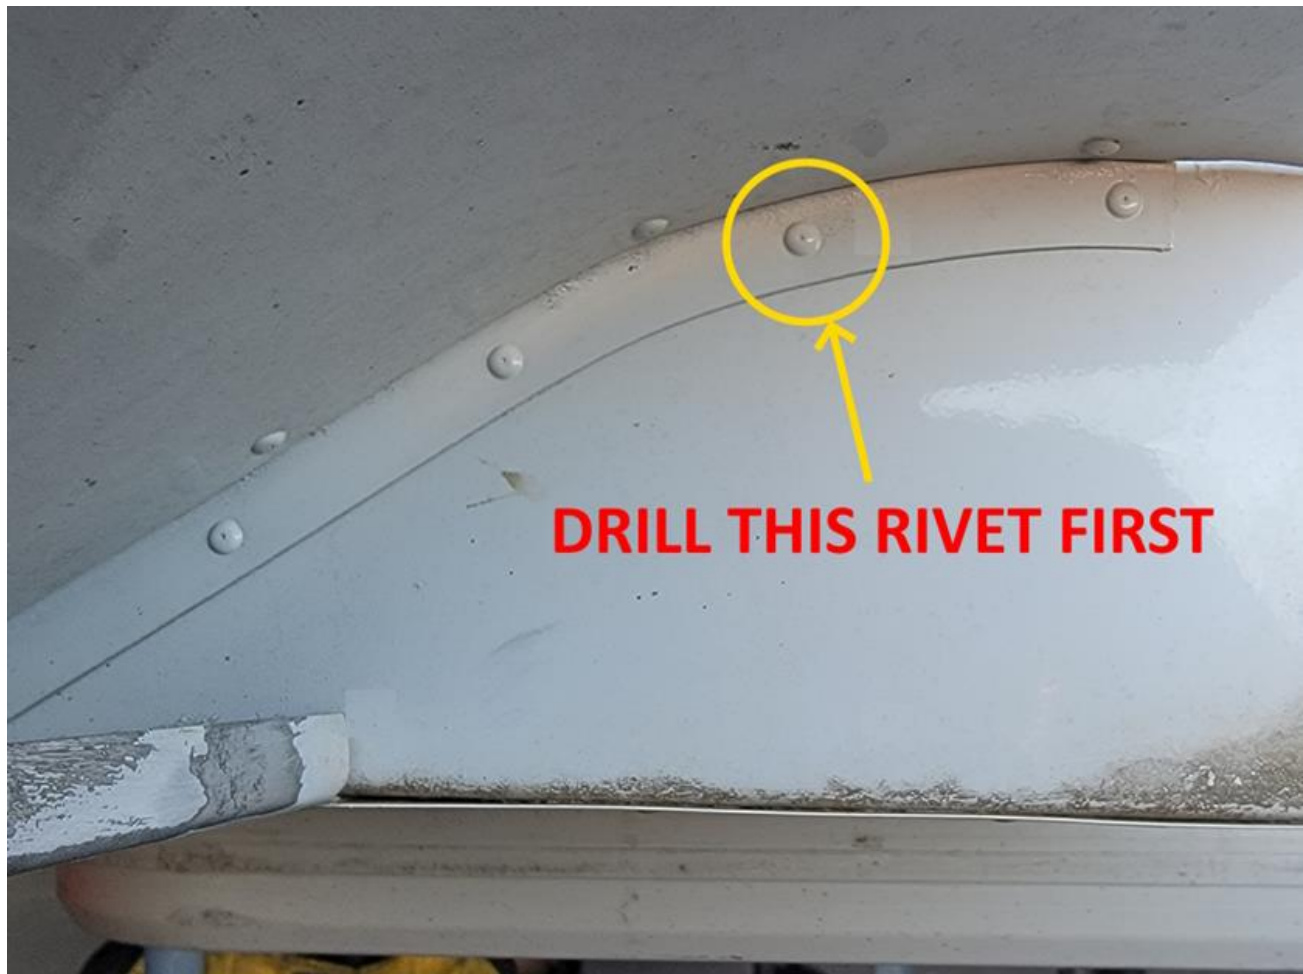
ROLL SERVO MOUNTING BRACKET RIB
